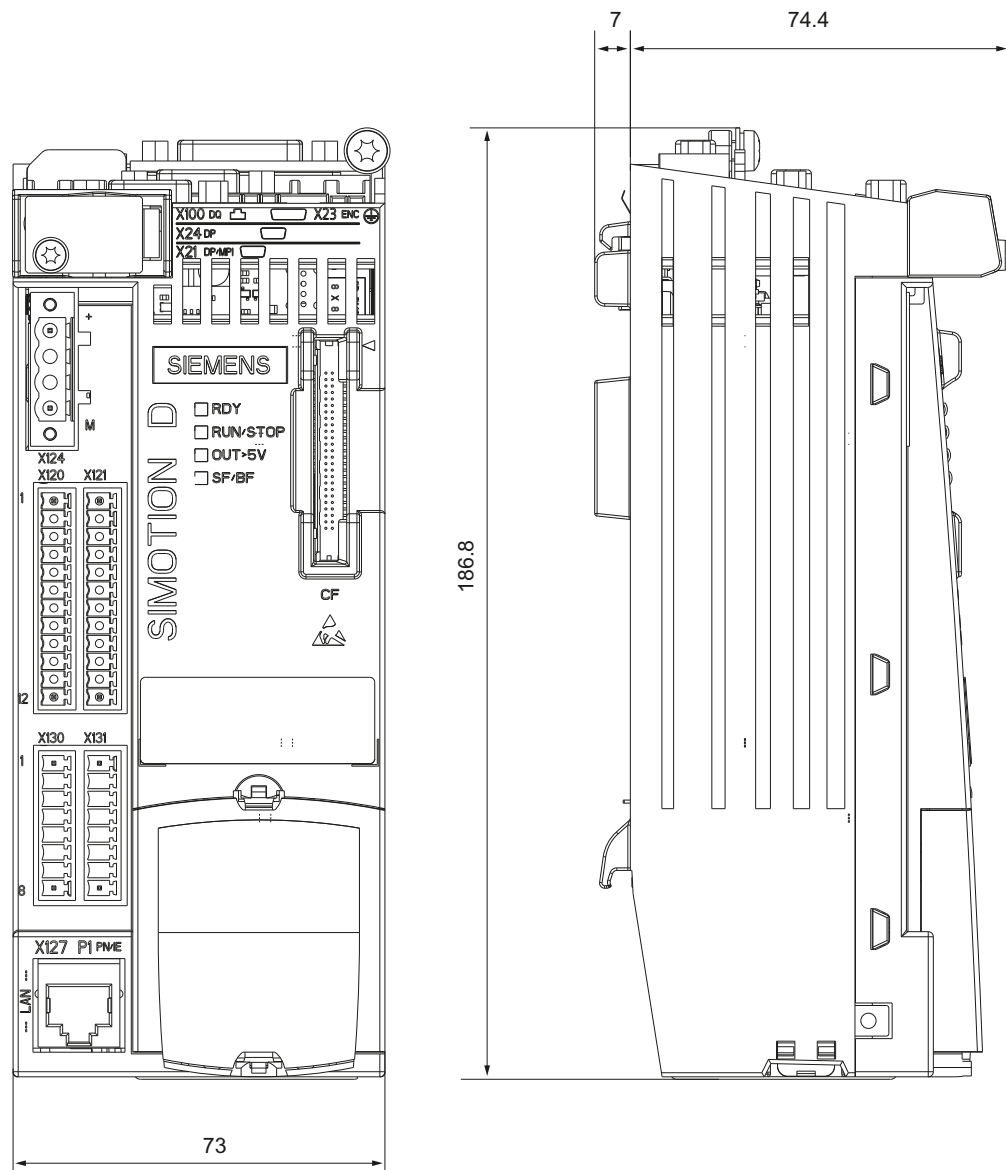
SIMOTION D410-2 DP dimension drawing (dimensions in mm)
